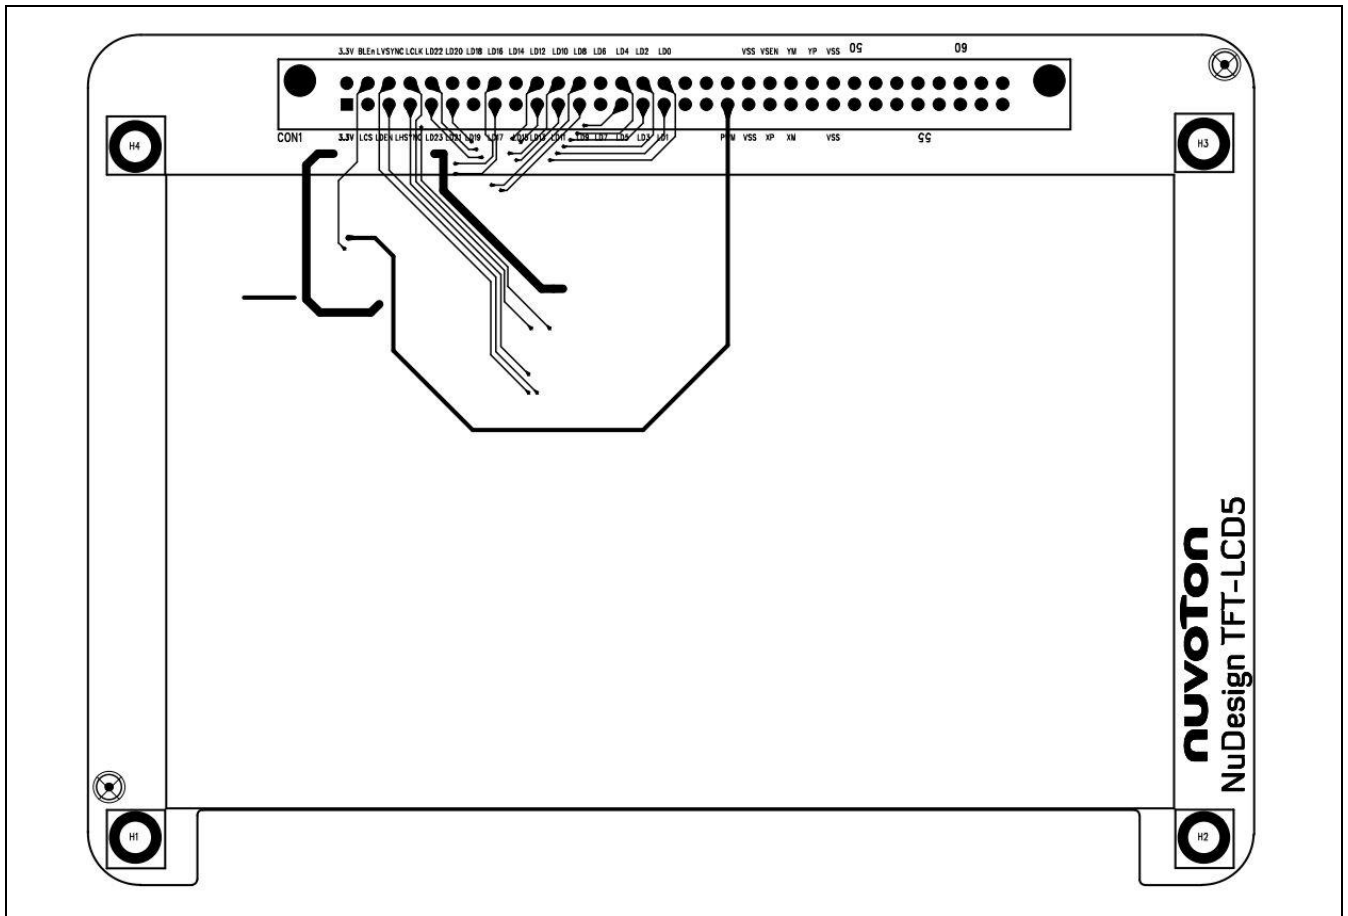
NuDesign TFT-LCD5 PCB Placement (Front)
